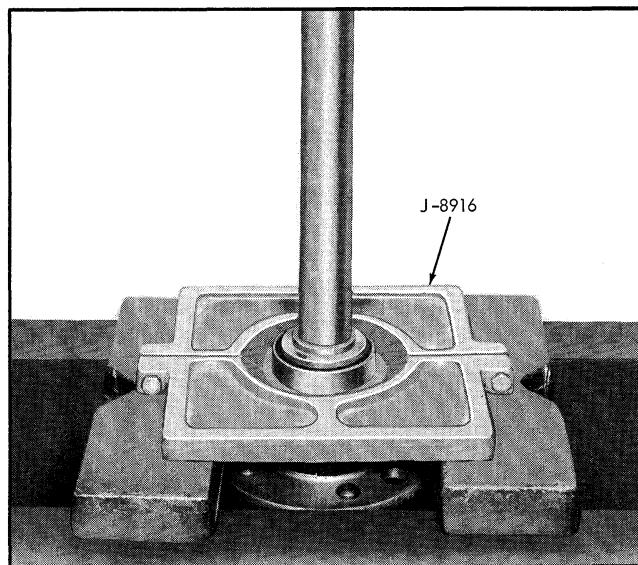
Removing Axle Shaft Bearing and Inner Retainer
